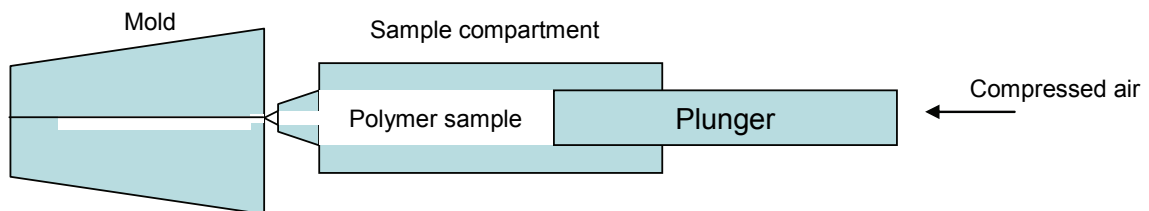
Schematic drawing of the used mini-injecting molding setup.
